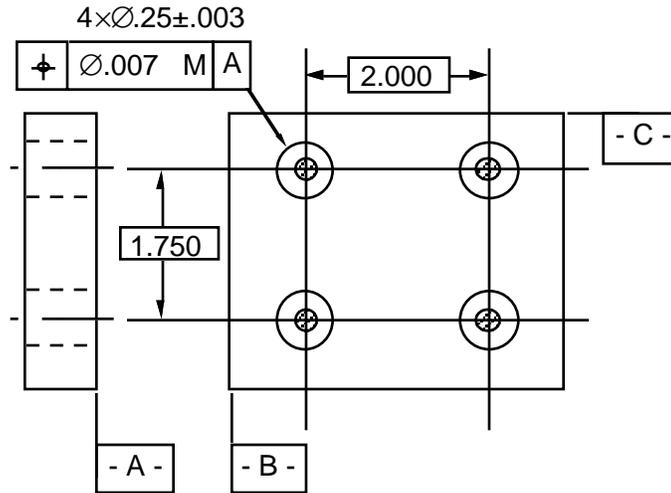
Plate with holes dimensioned and toleranced according to GD&T
